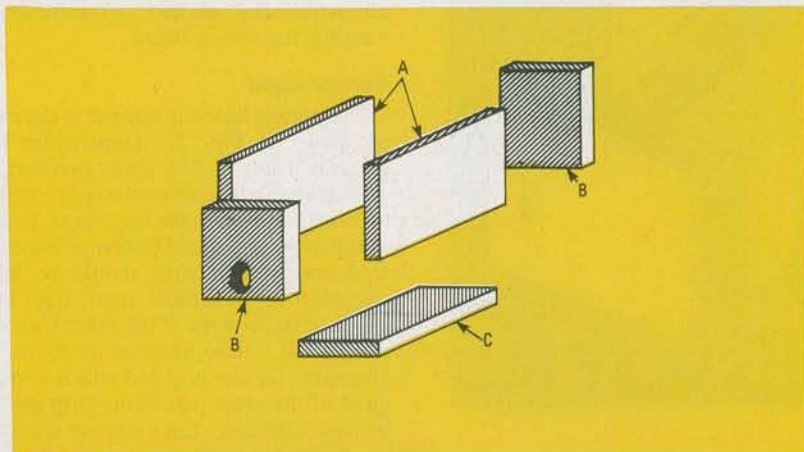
THE DIMENSIONS for the small sensor case shown here are given in Table 3. Be sure to drill a hole for the connecting cable.
